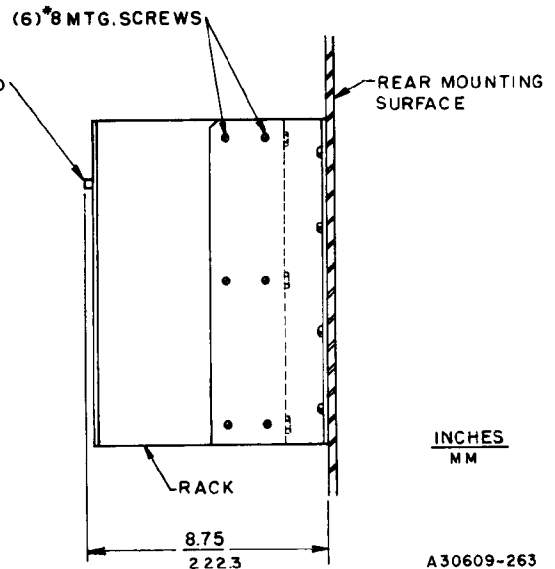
Type HRK100 Rack Assembly Mounting Dimensions
